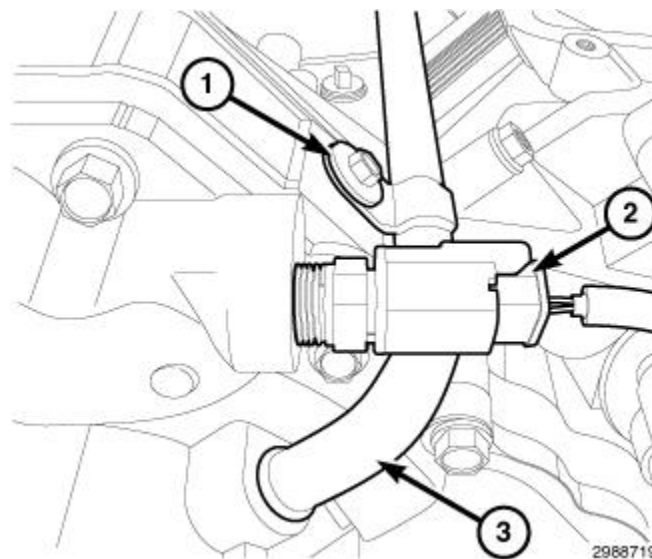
Coolant Temperature (ECT) Sensor Electrical Connector, Heater Tube & Retaining Bolt
